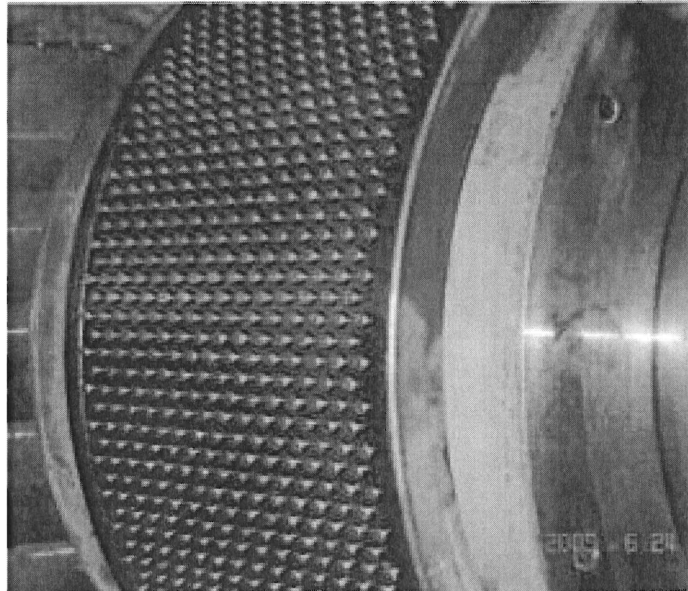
A photograph showing the Citic-HIC annular disc side mounted bolt-on edge protection system.
